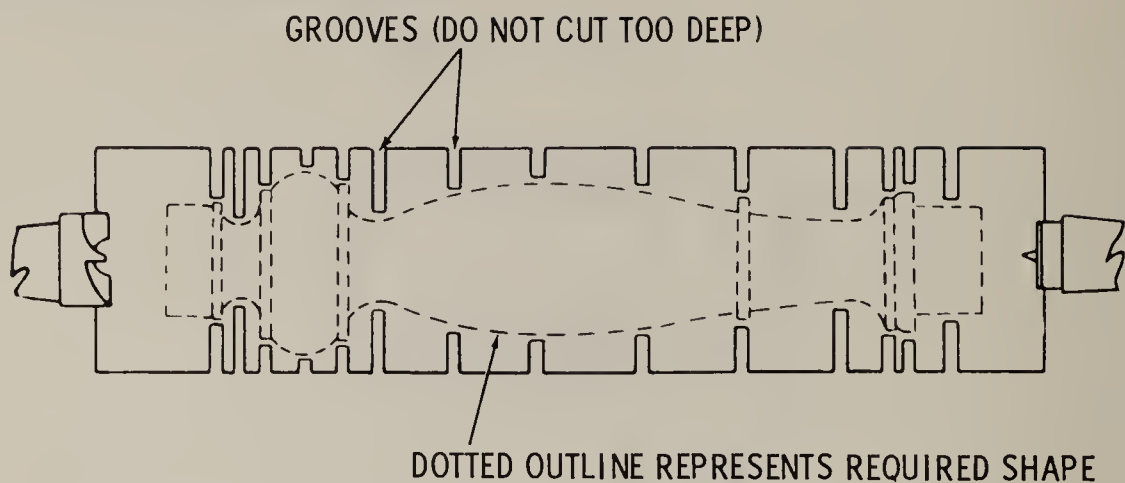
Parting tool used to cut grooves at various points of the work to be turned to a required shape. Each groove is cut nearly as deep as the finish diameter, allowing about $\frac{1}{8}$ inch for finishing.
